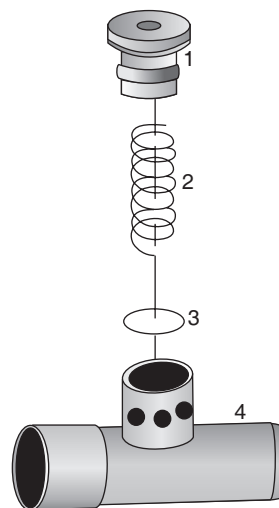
Parts of Heidbrink valve: 1. Cap of expiratory valve, 2. Spring, 3. Valve (pin and disc), 4. Body of Heidbrink valve
